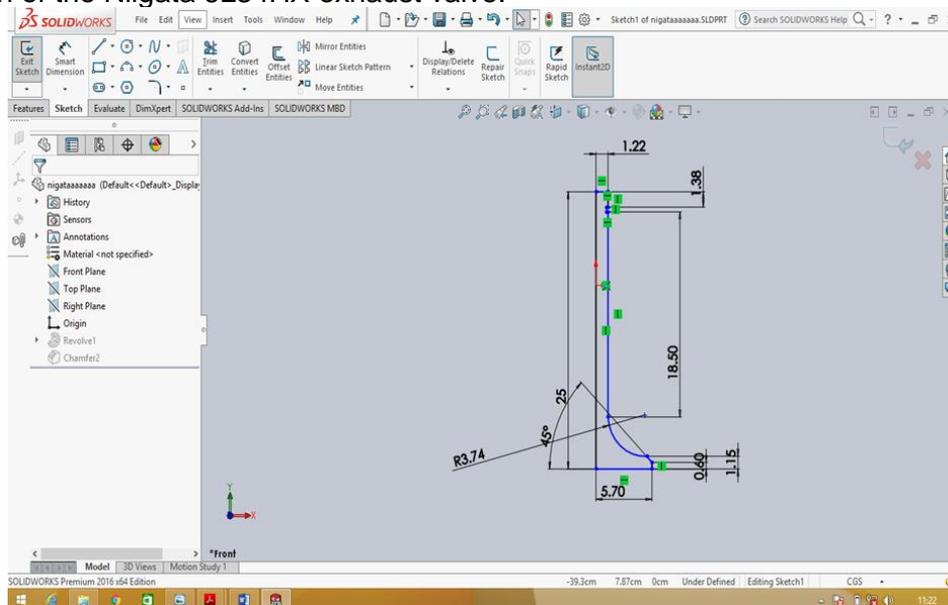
Two-dimensional sketch of the exhaust valve geometry developed in SolidWorks, showing key dimensional parameters and the fillet radius (R3.74 mm) used for the 3D model generation.
